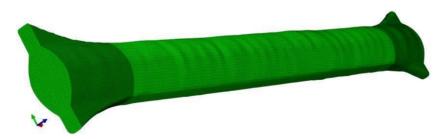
Scanned and meshed geometry which considers the relevant surface features of a welded sample for uniaxial tensile testing
